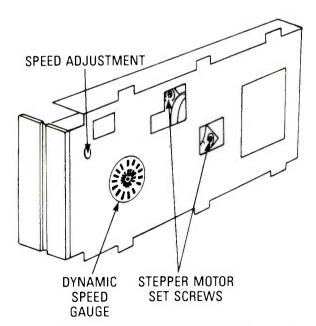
BOTTOM OF THE DRIVE ASSEMBLY. The speed indicator is the stroboscopic pattern on the bottom of the drive flywheel. Outer pattern is for 60 Hz, inner is for 50 Hz.
